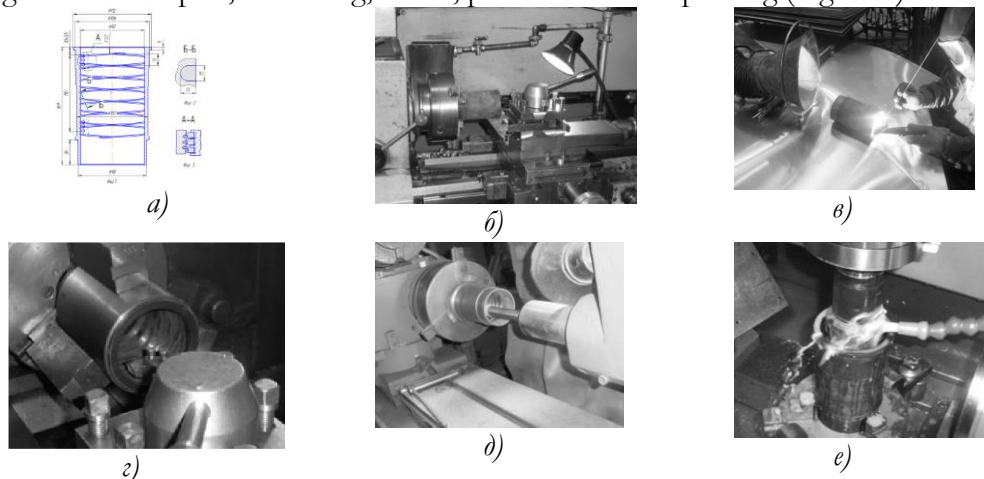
process of manufacturing metallic copper cylinder liners: a) cylinder liner with opposing screw grooves; b) cutting of screw grooves; c) welding
